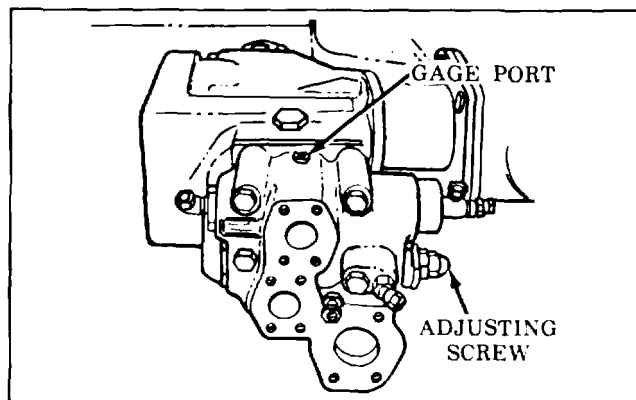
Hoist winch combination control valve gage port and adjusting screw.
